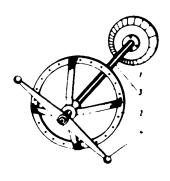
Plug for Pressing the Fuel Manifold and Combustion Chamber Assembly out of Support Casing
